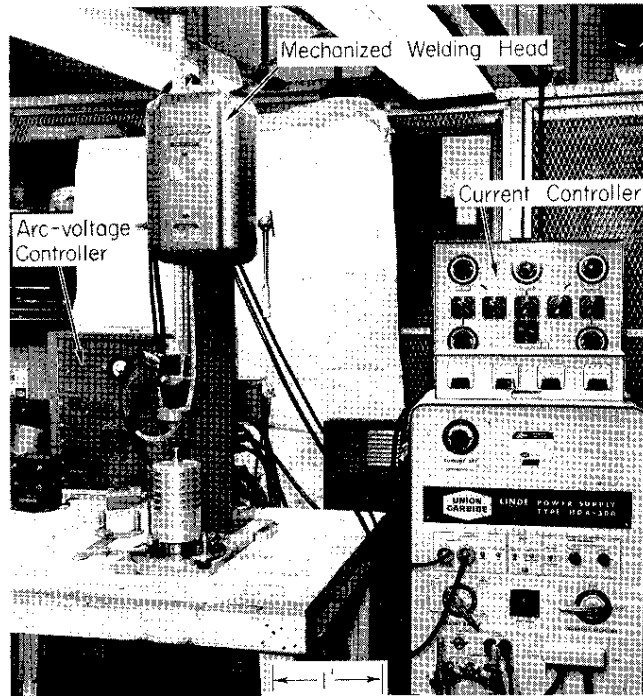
AUTOMATIC TUNGSTEN-INERT-GAS (TIG) WELDING EQUIPMENT
